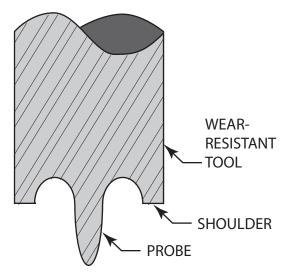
Cutaway of a friction stir welding tool.
